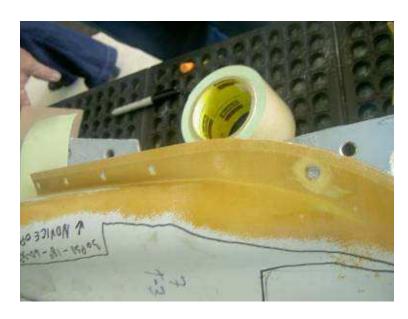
Stripped fibreglass part showing removal of coating and no fibre or fastener hole damage.
